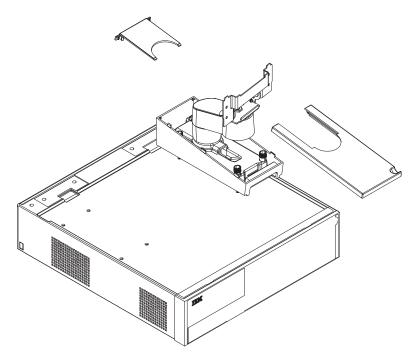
Securing the arm assembly to the SurePOS 720, 740, 780
